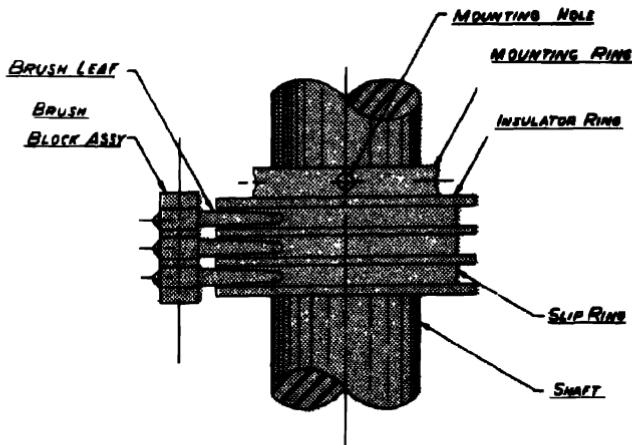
Drum-type slip ring assembly. (Courtesy of Englehard Industries. From Reference 4.)
